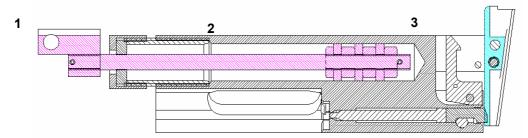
The bolt aggregate: 1 - the hydraulic or pneumatic spring, 2 - the bolt, 3 - the striking hammer mechanism
